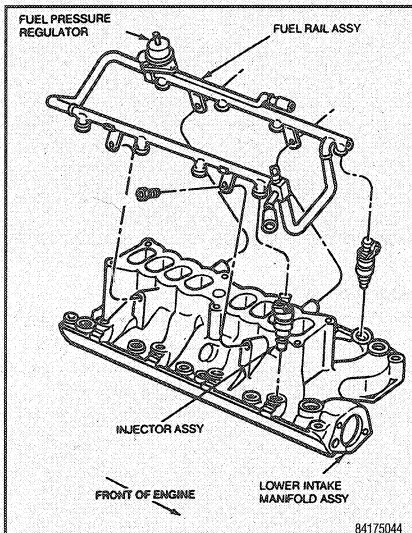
Fuel rail (fuel supply manifold)—5.0L engine
